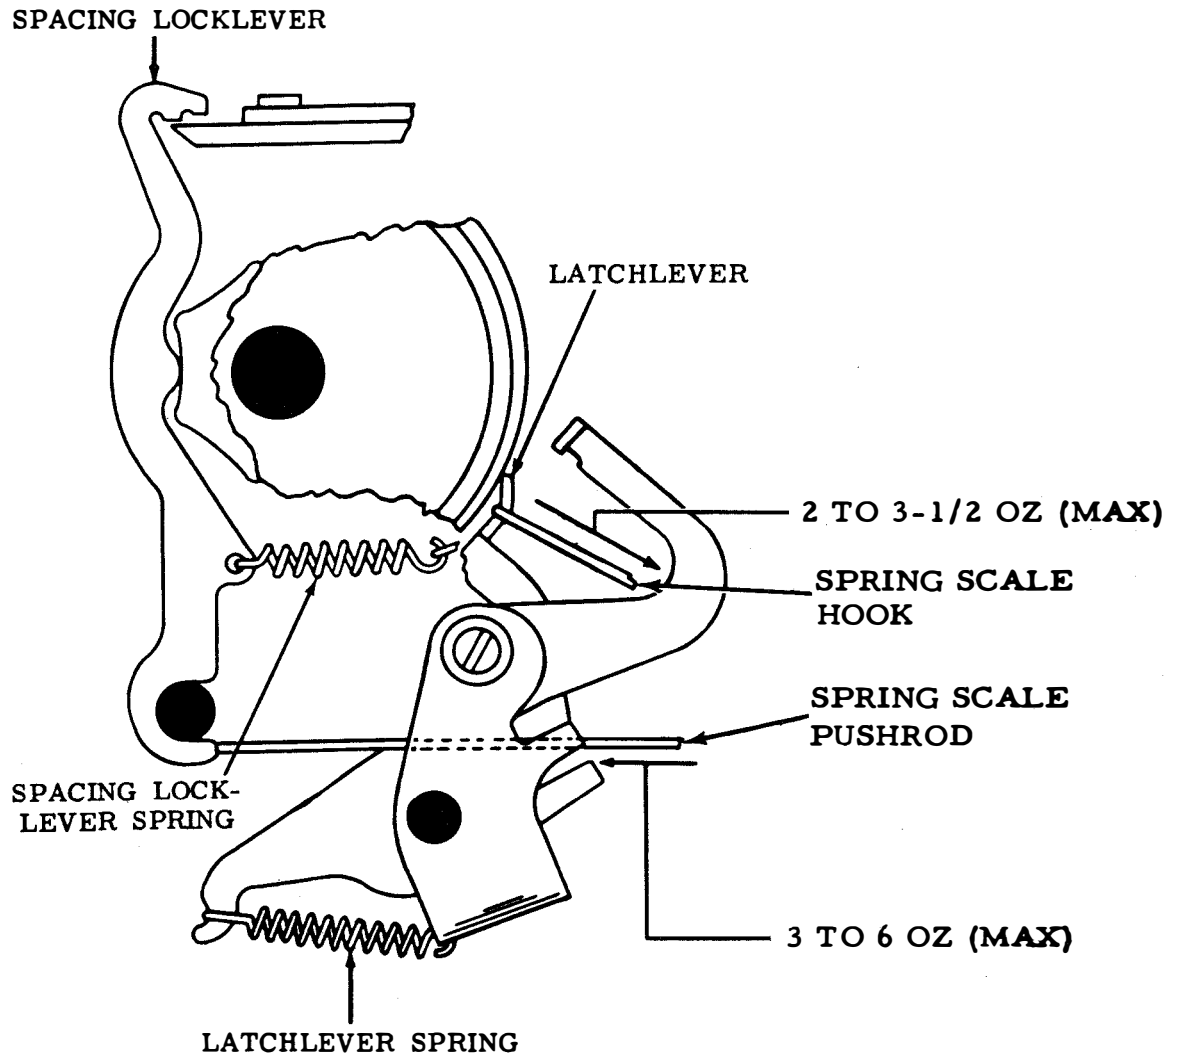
Selector Clutch Latchlever Spring and Spacing Locklever Spring
